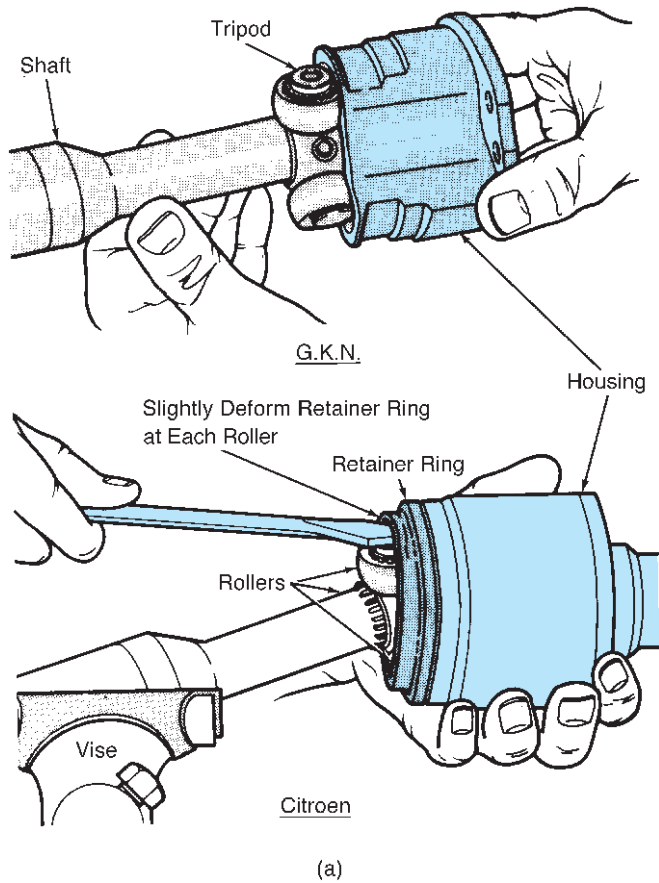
A tripod CV joint is disassembled by removing the retainer ring and housing (a) and removing the snap ring and driving the inner race from the shaft (b). (Courtesy of DaimlerChrysler Corporation)
